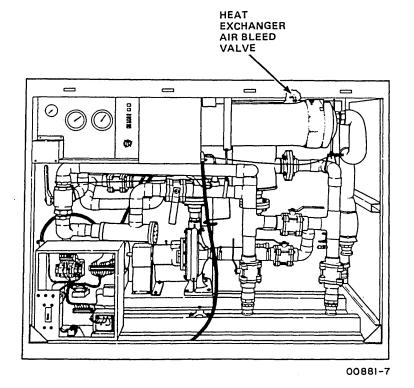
Air Bleed Valve on 220-L/min (58-gal/min) Unit
